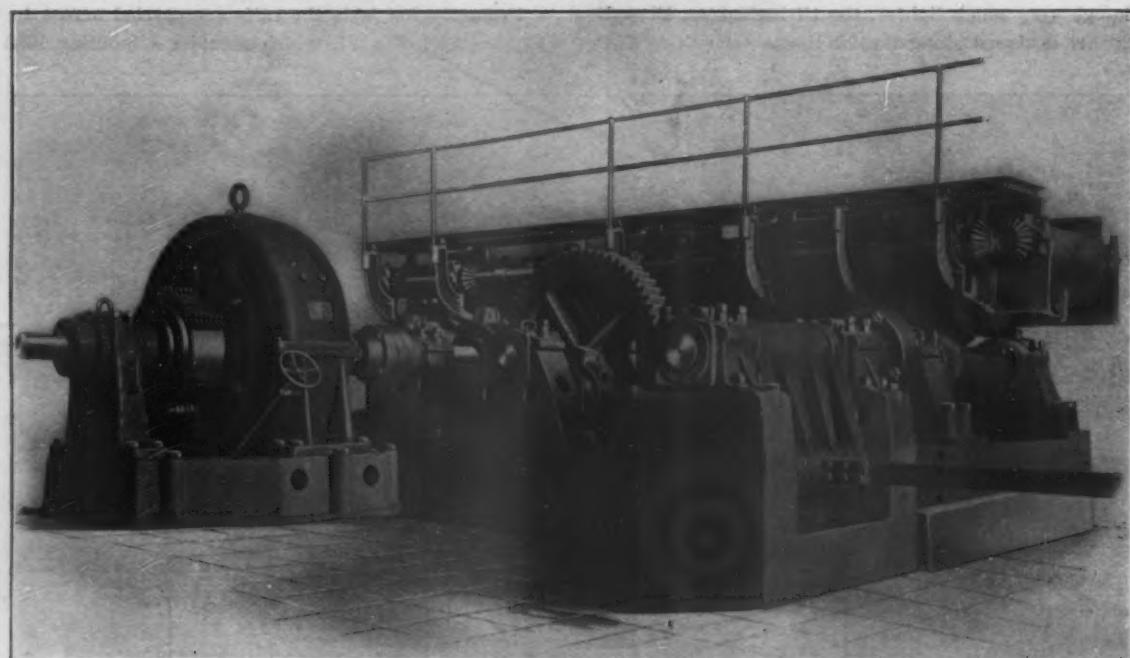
Tilting Tables for the 28-In. Rail Mill—Operating Side.
